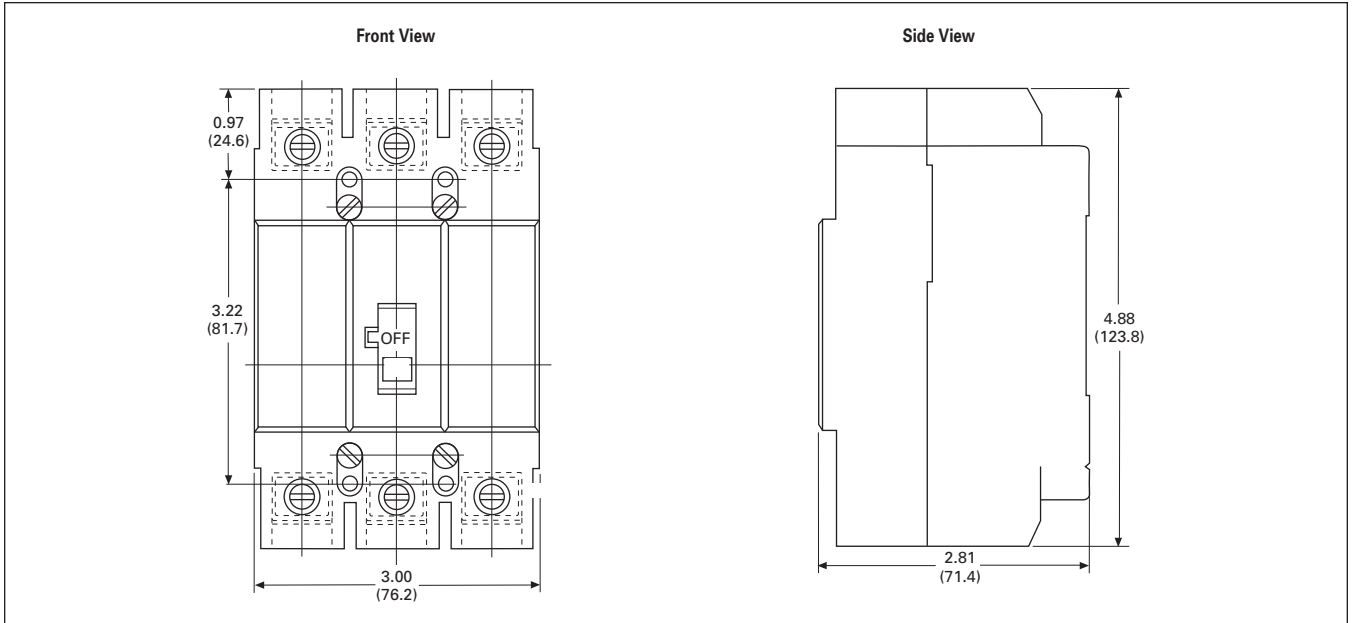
GC-Frame, 3-Pole — Dimensions in Inches (mm)
